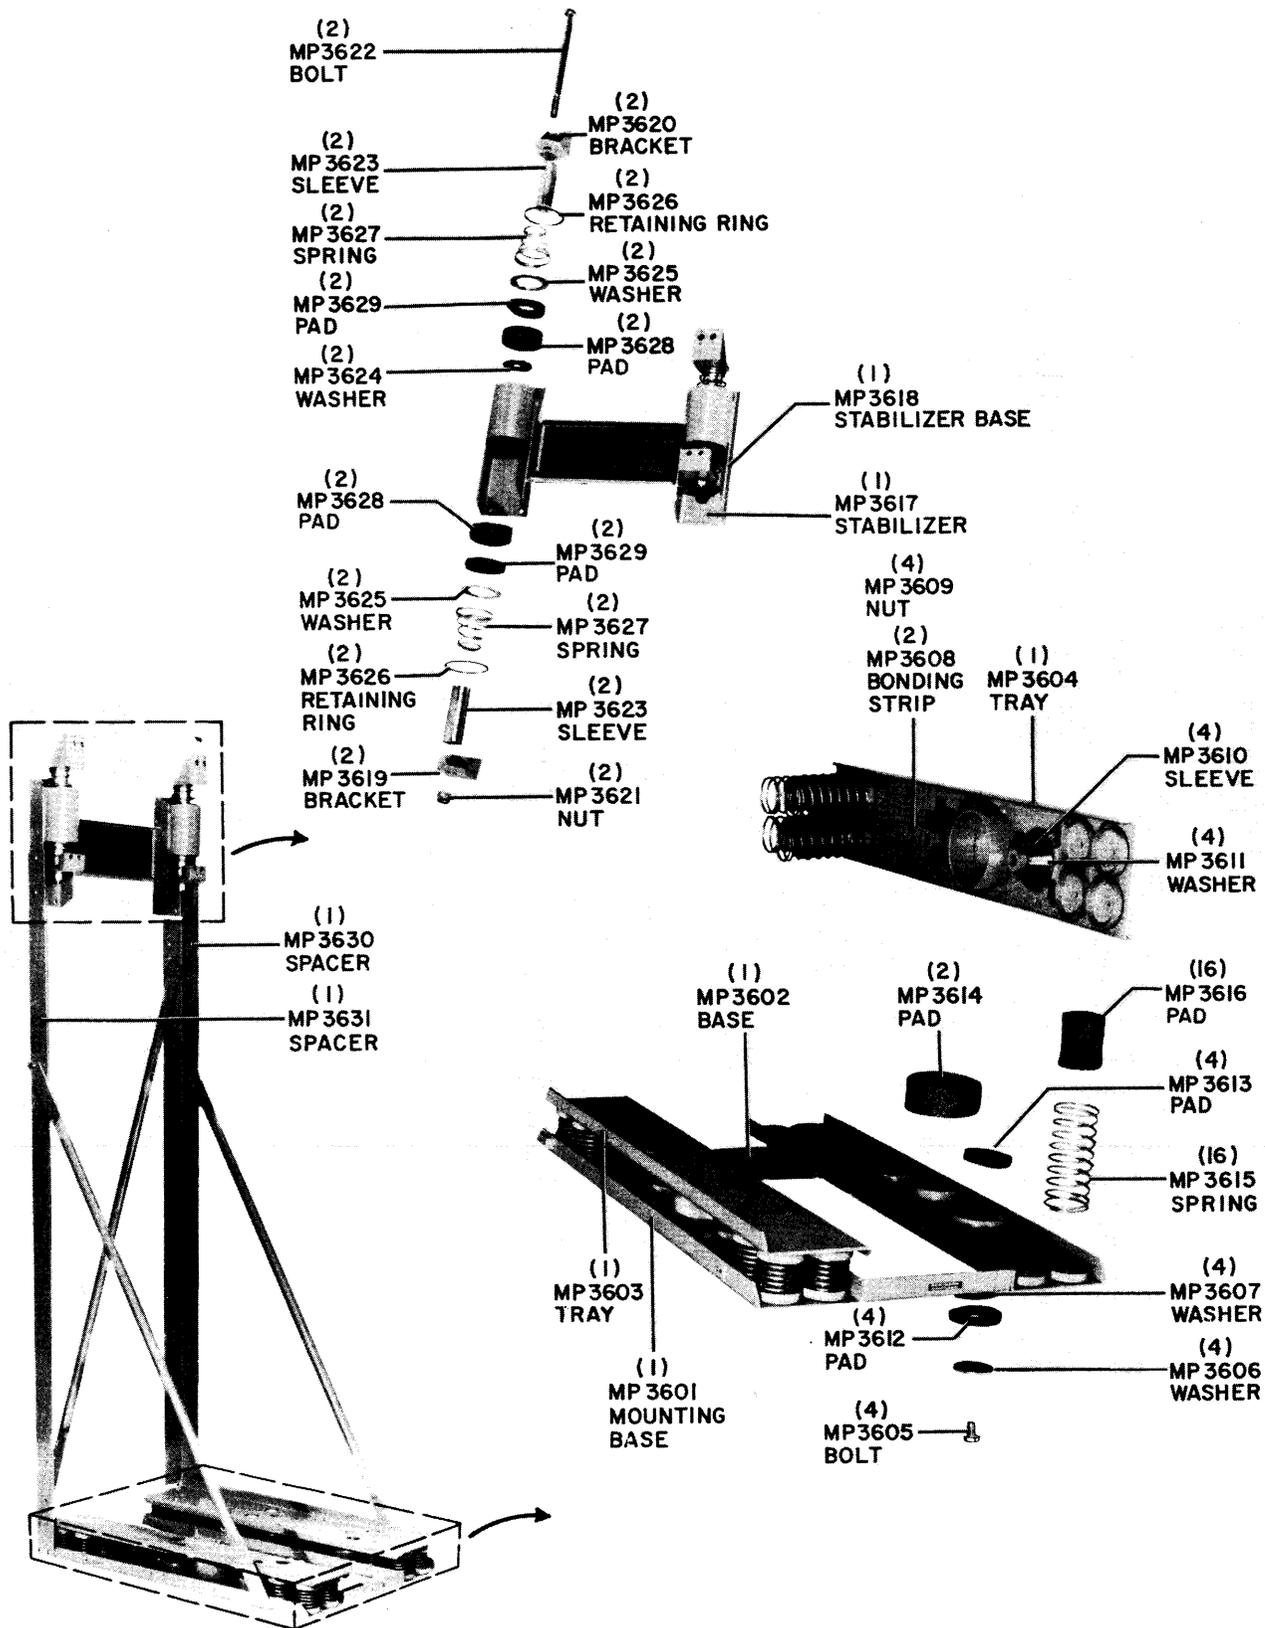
B. Mounting MT-2170A/WRT, Replacement of Parts
